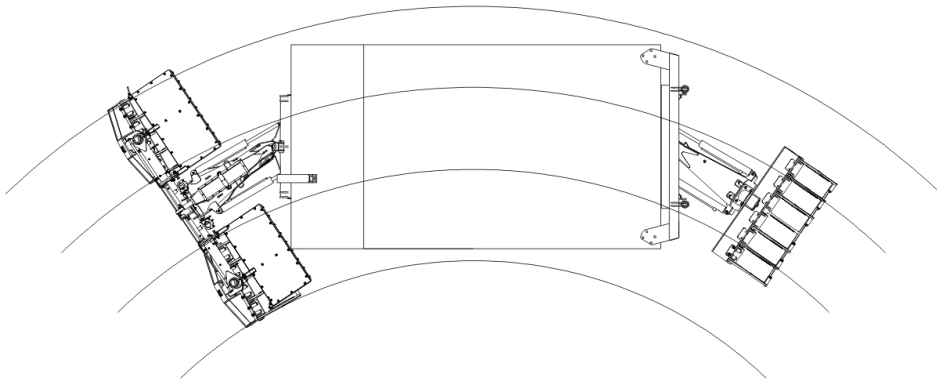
D-6: Action of Front and Rear Roller Assemblies in a Turn
